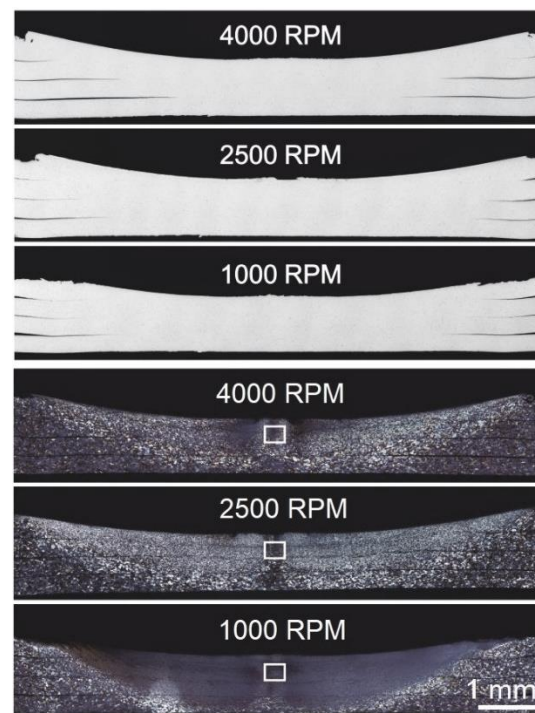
Polished and etched cross-section views of the welded joints (4000, 2500 and 1000 RPM)
